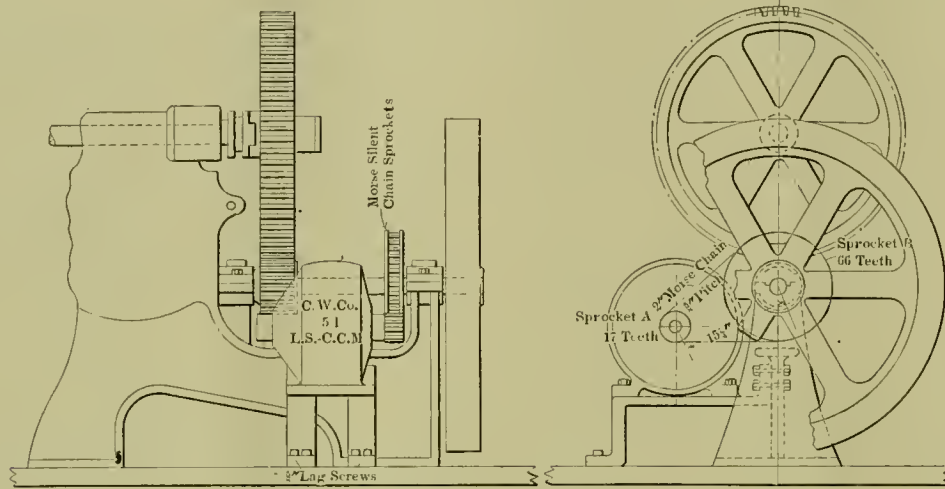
MOTOR DRIVE ON SMALL PUNCH.
